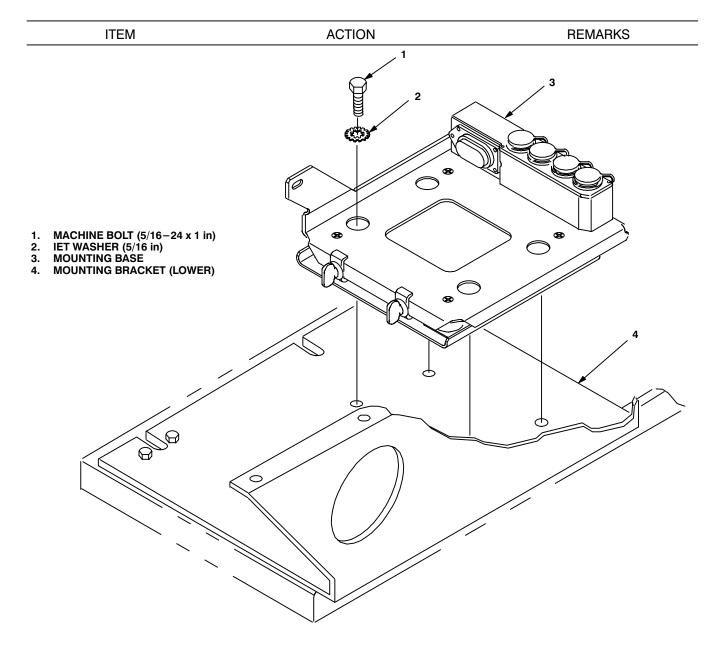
(2). Mounting Base Installation: Installing Mounting Base
